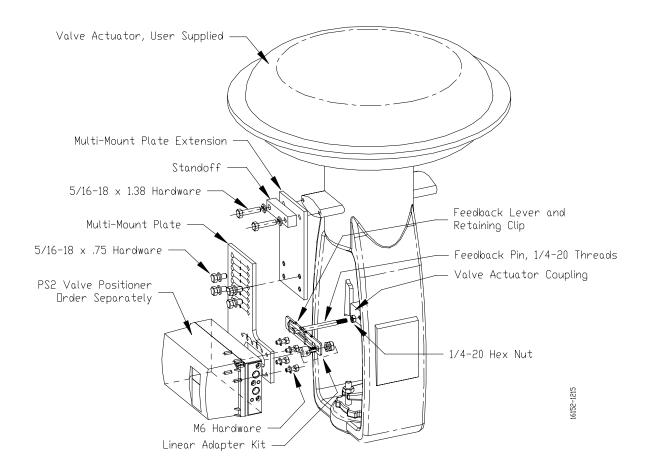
Actuator with Shaft Coupling, Exploded View
